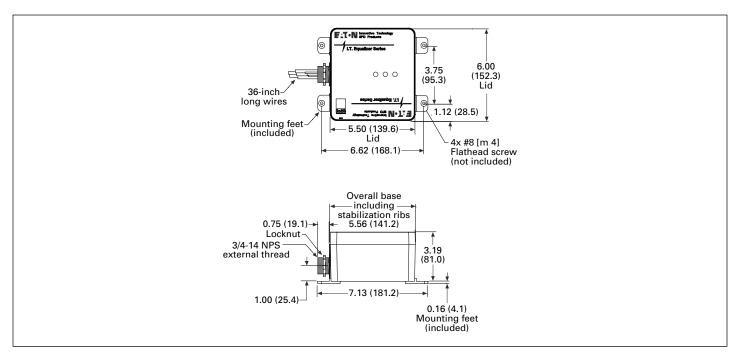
P1 enclosure, NEMA 4X with mounting feet dimensions, weight = 2.5 lb
